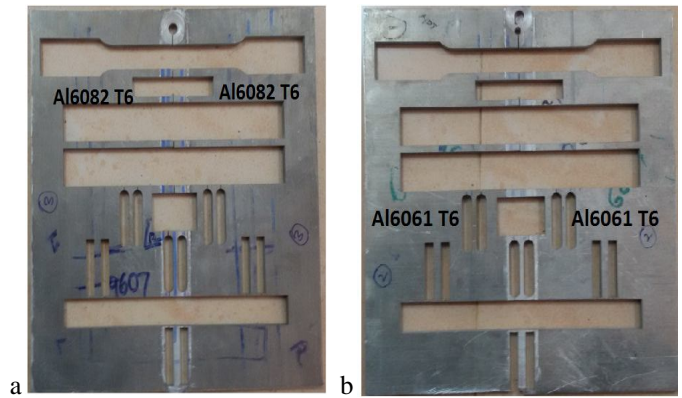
Friction Stir welded similar joint (a) (AA6082-AA6082); (b) (AA6061- AA6061)
